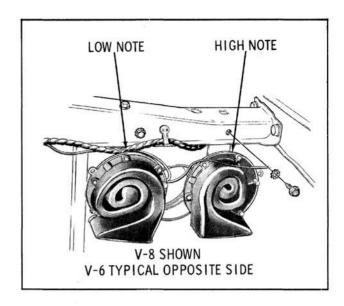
Horn Mounting (30-31 & 32 Series)
